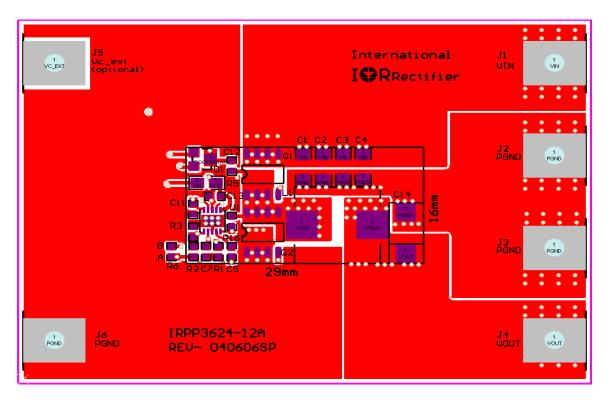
IRPP3624-12A Reference Design top layer placement and layout.
